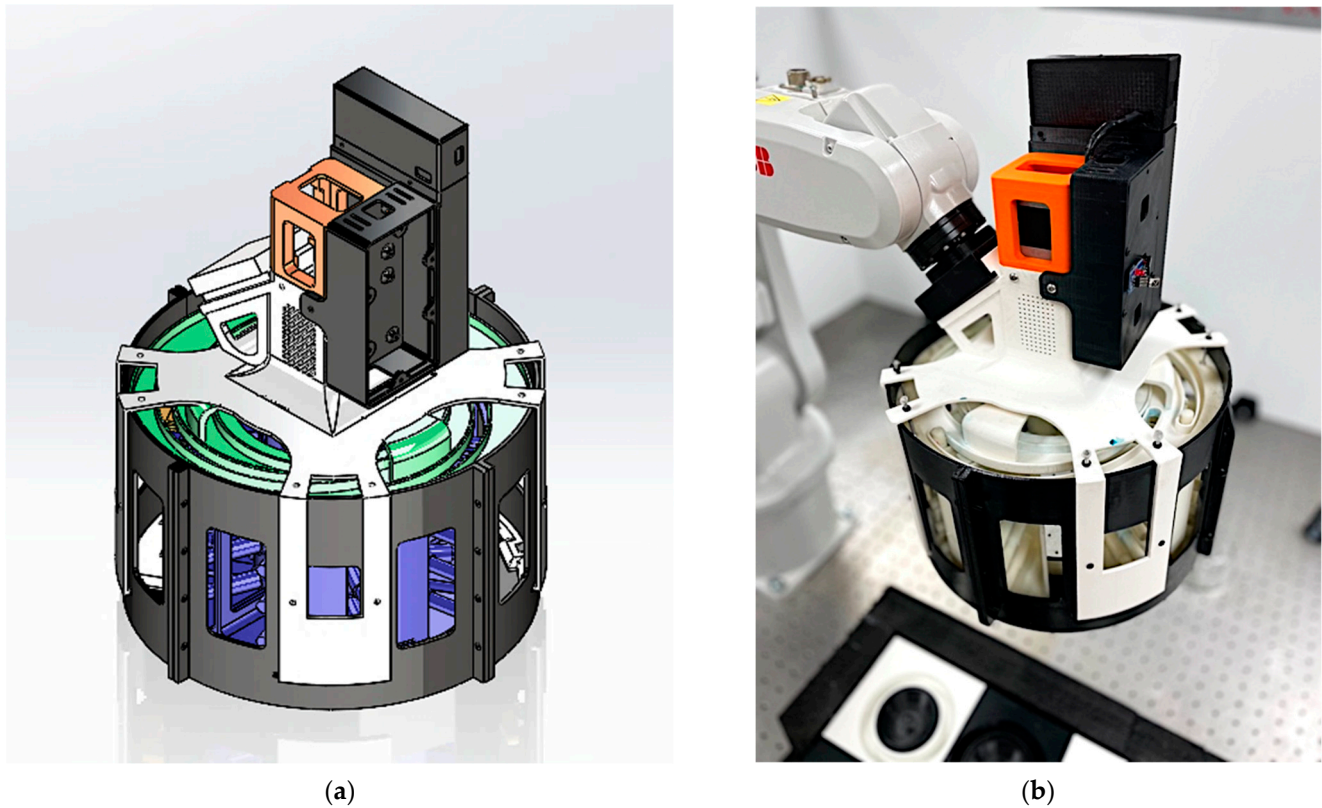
(a) Design assembly excluding electronics, screws, and actuation system; (b) actual prototype attached to the 6-axis industrial robotic arm.
